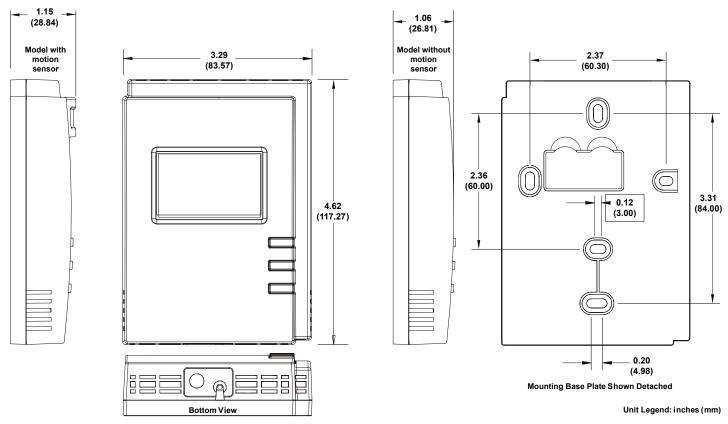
Front view, bottom view, back plate, and side view for models with and without motion sensor.
